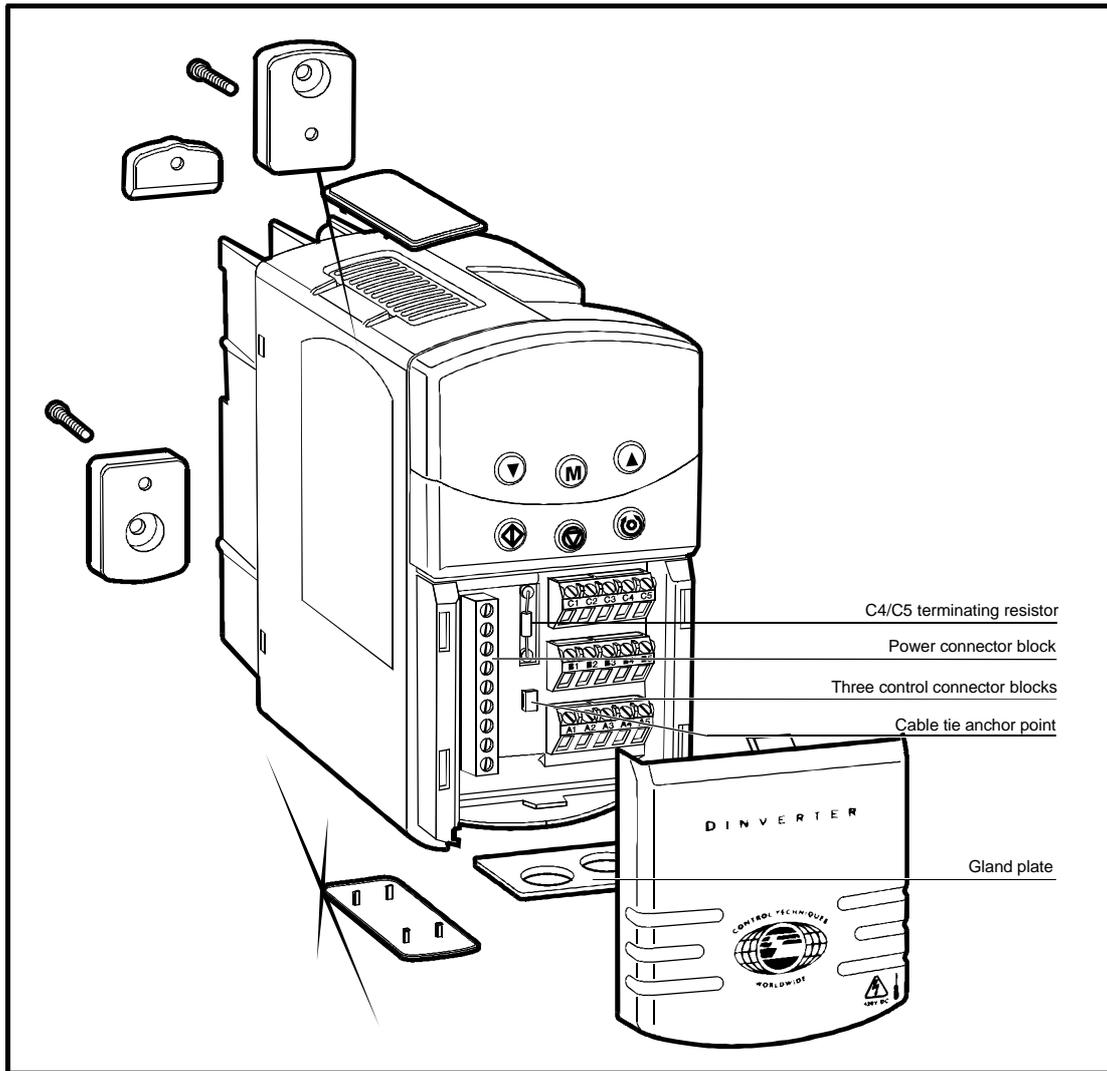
Diverter A parts supplied showing terminal chamber
